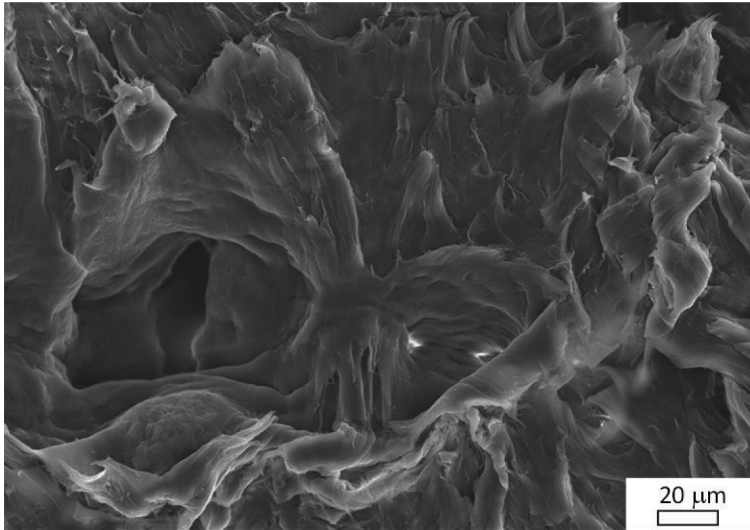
Fracture surface obtained from fracture tests of IM PA-12 at 23°C.
